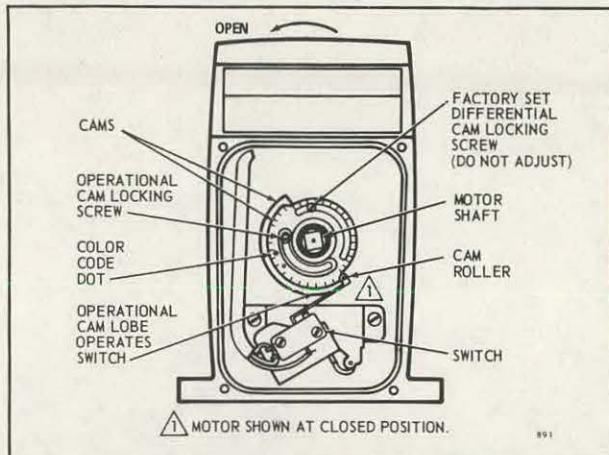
LOCATION OF AUXILIARY SWITCH IN THE M445 OR M845 MODUTROL MOTOR.
